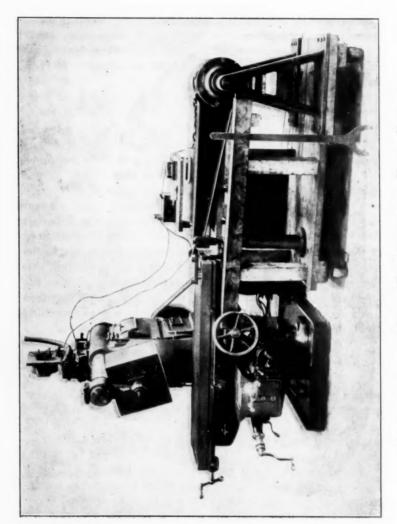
Apparatus for Testing FEED Efficiency of Milling Machine
